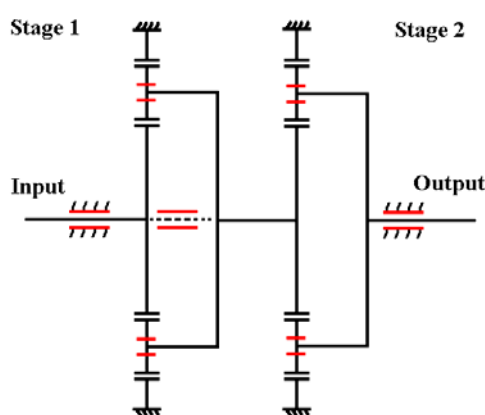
Schematic of the compound planetary system with bearings (red lines).
